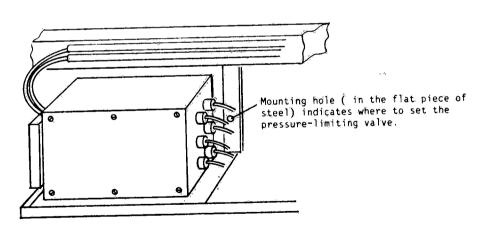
ADJUSTING PRESSURE LIMITING VALVE.
